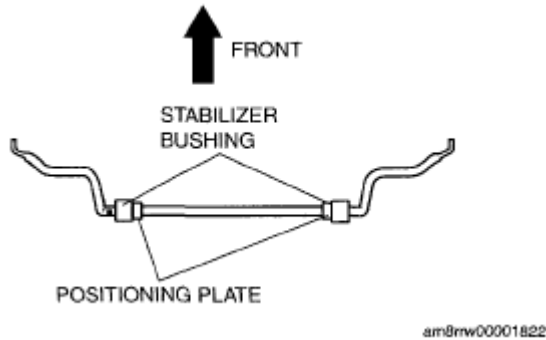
Aligning Outer Side Of Positioning Plate With Stabilizer Bushing
